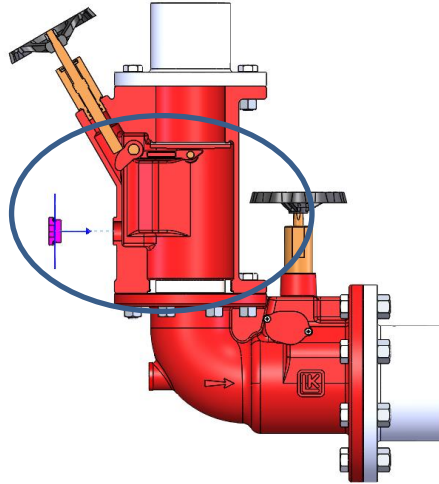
Bottom part of straight storm valve with removed G7/8" plug.
